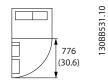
Space in front of IP21/IP54 enclosure type, frame size F8
